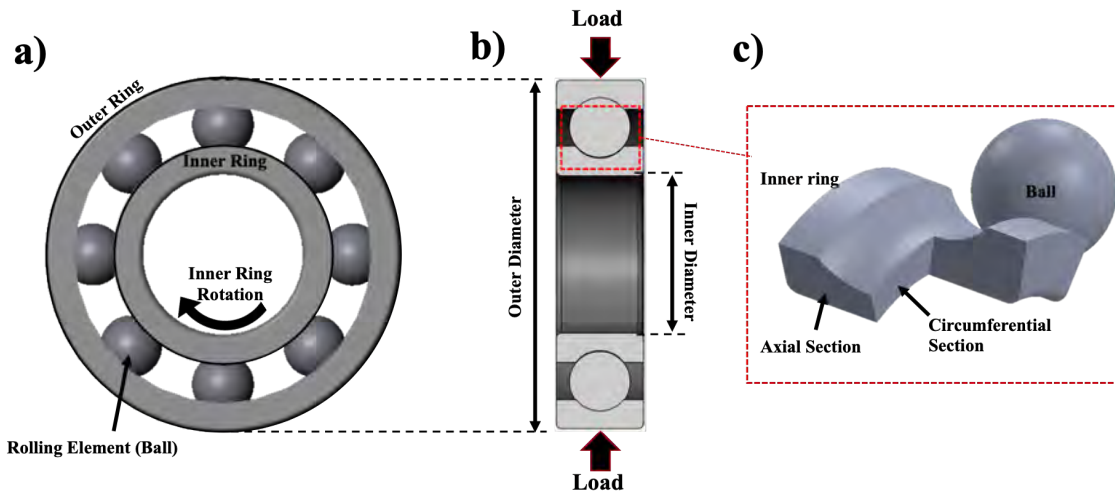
a) A DGBB diagram showing both inner and outer rings, and the balls keeping both rings in contact. b) Cross section showing the geometry of both rings and load applied to the bearing. c) Common terminology used for sections of the inner ring.
